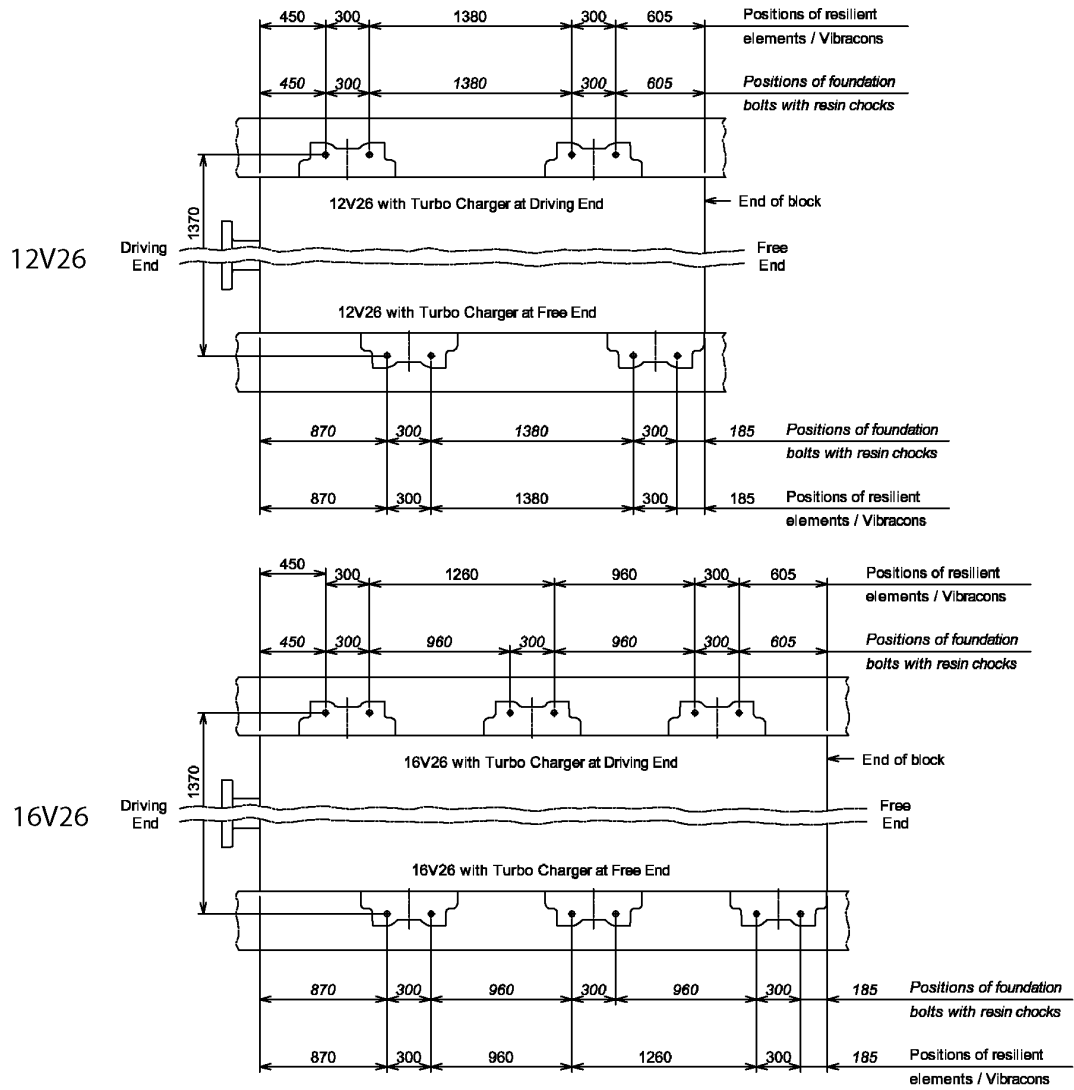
Foundation top-view and drilling plan, V-engines (9813ZT112a)
